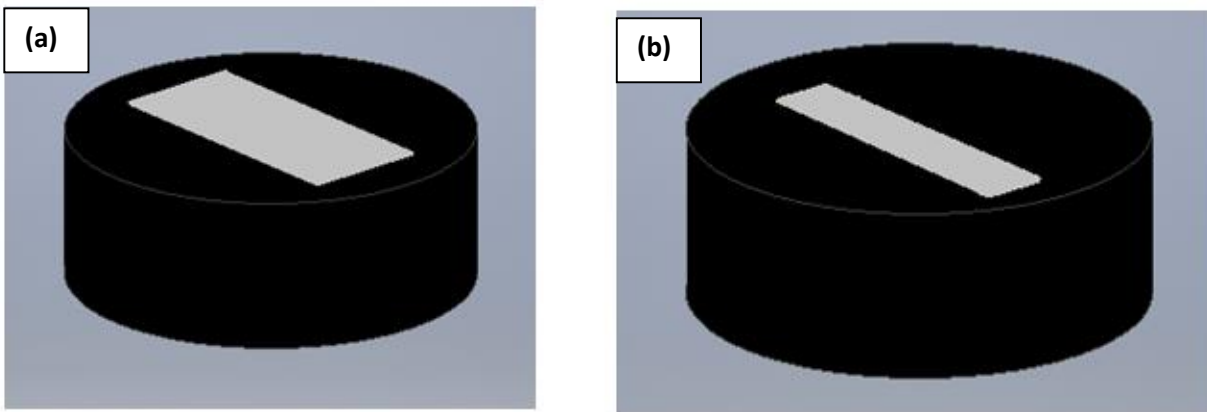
Schematic representation of (a) as deposited sample in mold and (b) sample to be heat treated in mold
